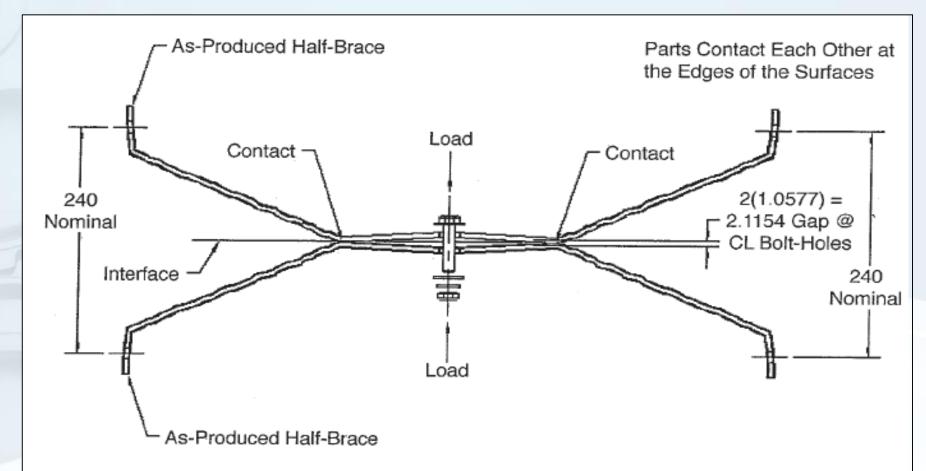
Form tolerances: Brace assembly with concave form error (before loading).
